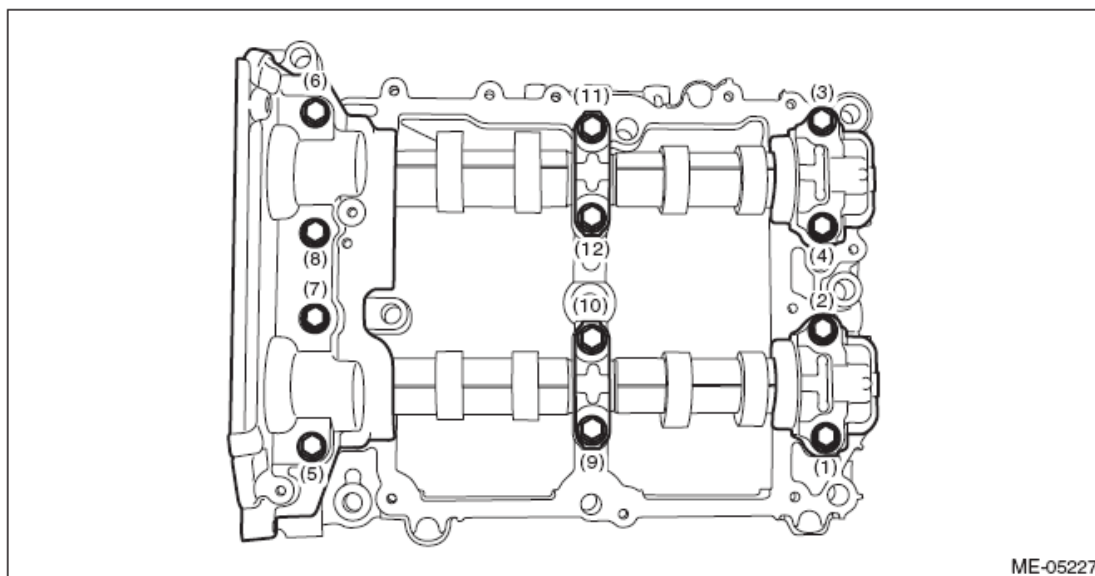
Identifying Camshaft Caps Bolts Tightening Sequence
